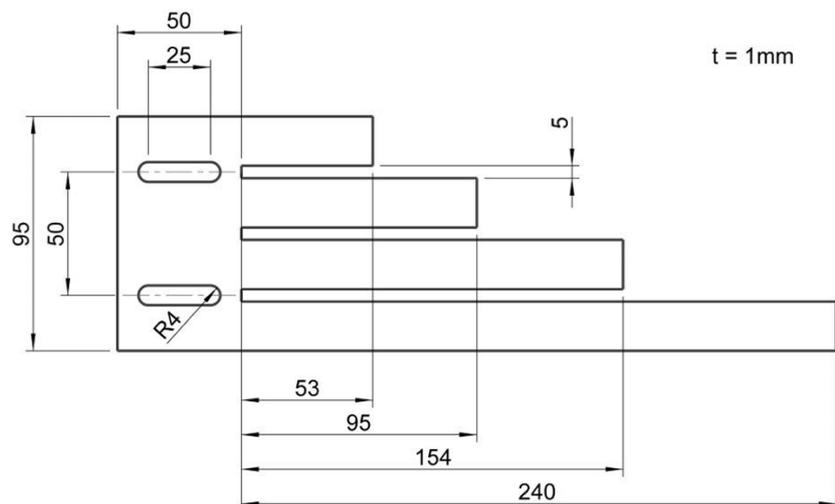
Dimensions of the specimen for shock measurements (all dimensions are given in mm)
